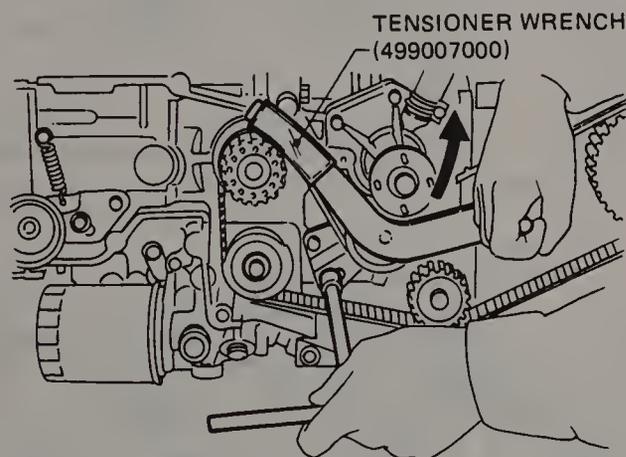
A special wrench is required to remove the belt tensioner and spring (Sec 5)
